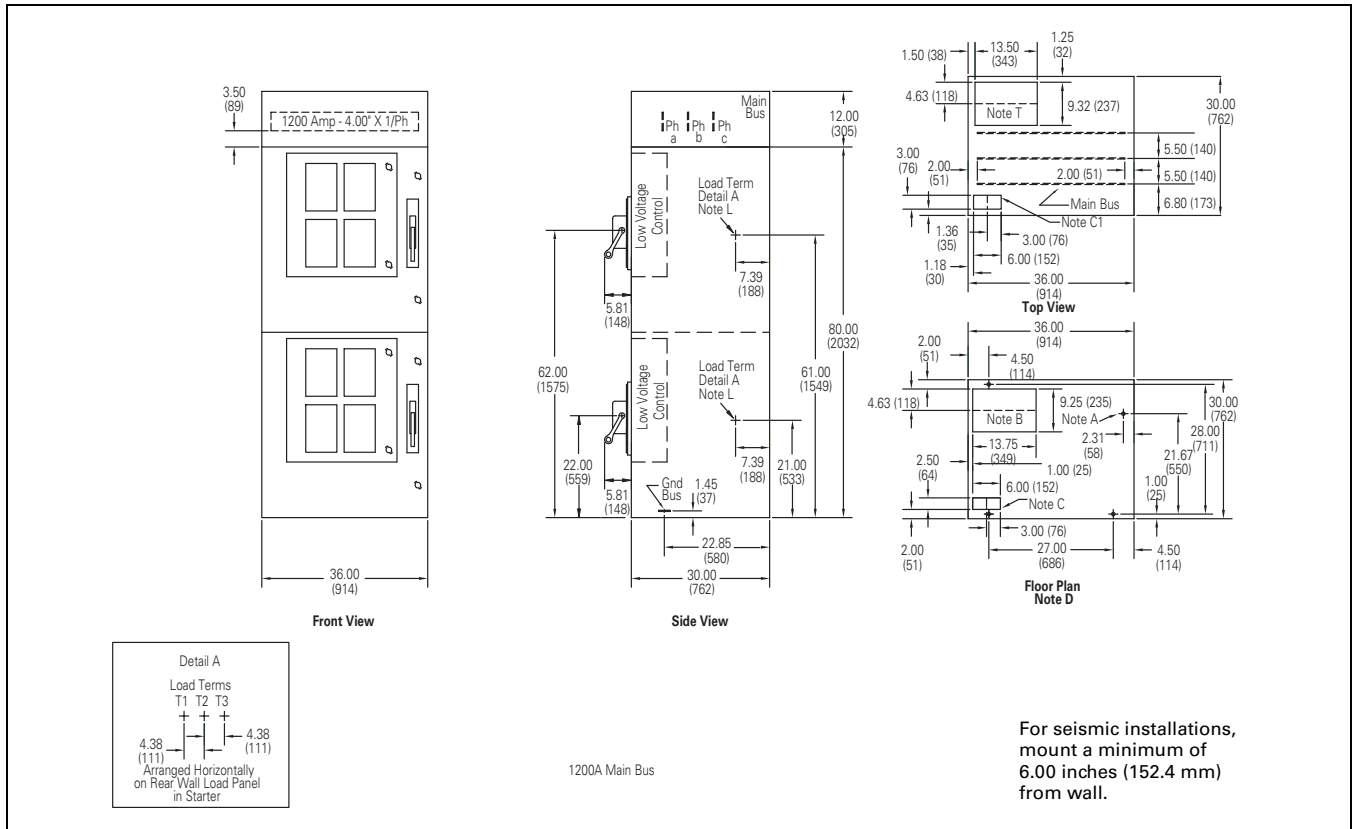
Arrangement 1 Detail (Full Voltage 400 A)—See Table 10.1-27 on Page 10.1-37 for Notes
